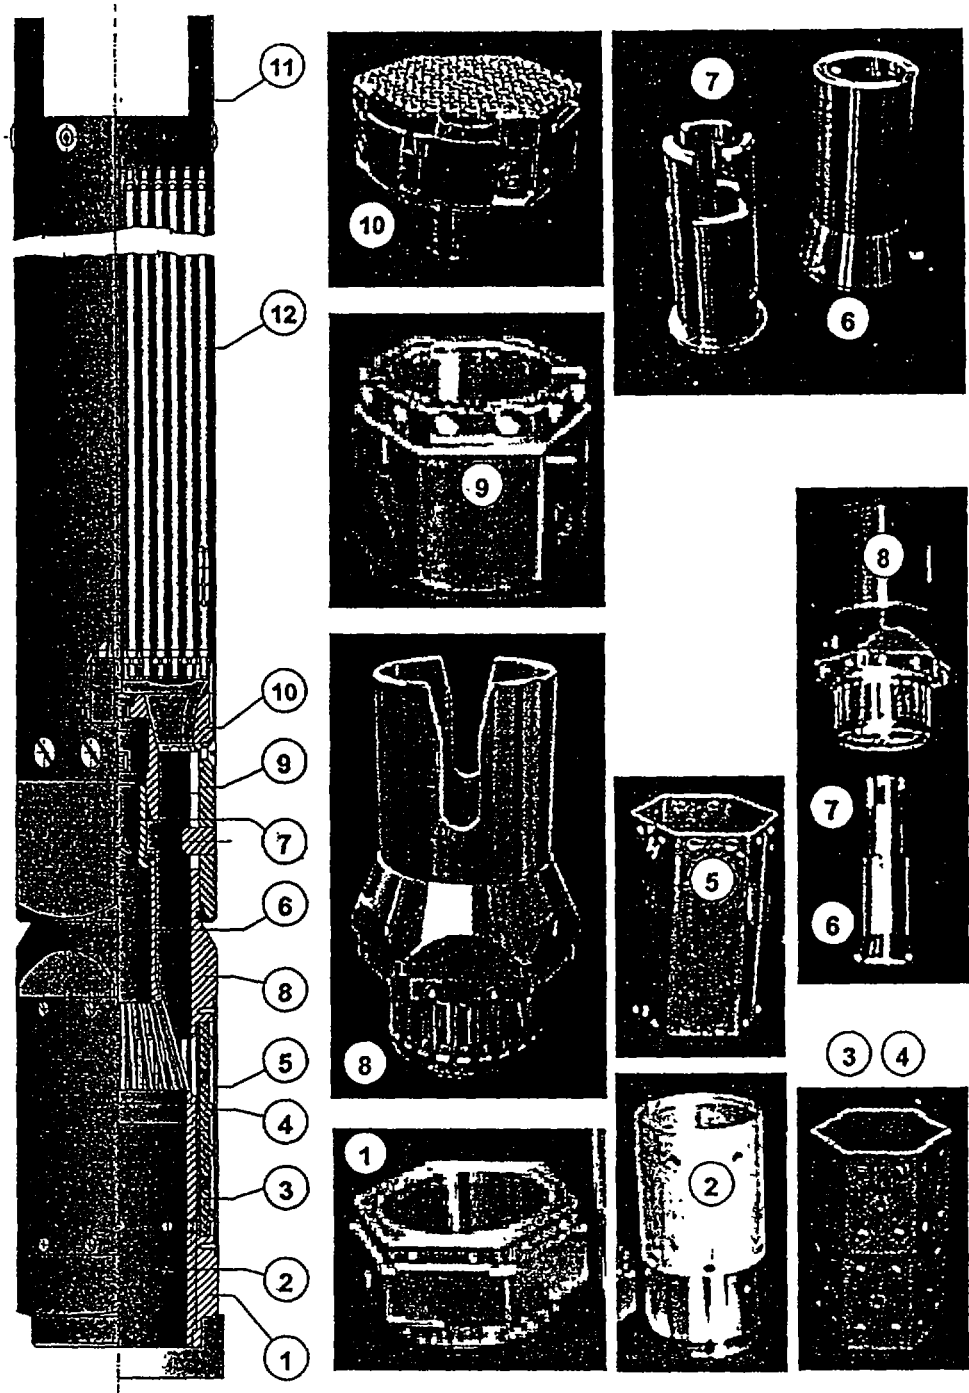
LR-0 Control Assembly - Design and Real Parts
